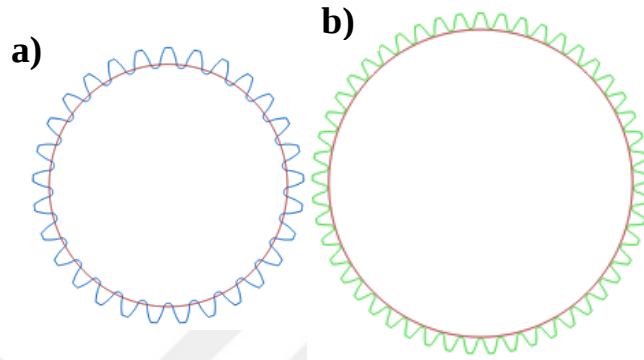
2D Gear Geometry of Gear Pair of 29 and 49: a) Pinion; b) Gear.
